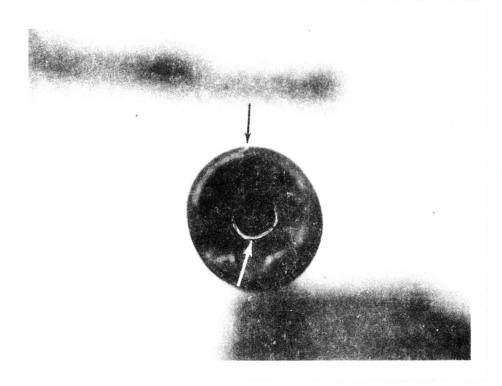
View showing crack in wall of barrel extending through locking lugs and body of a cartridge case. (Case head was sheared off during weapon disassembly.)
